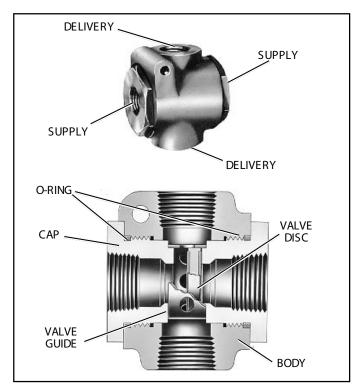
DOUBLE CHECK VALVE (DISC TYPE)
